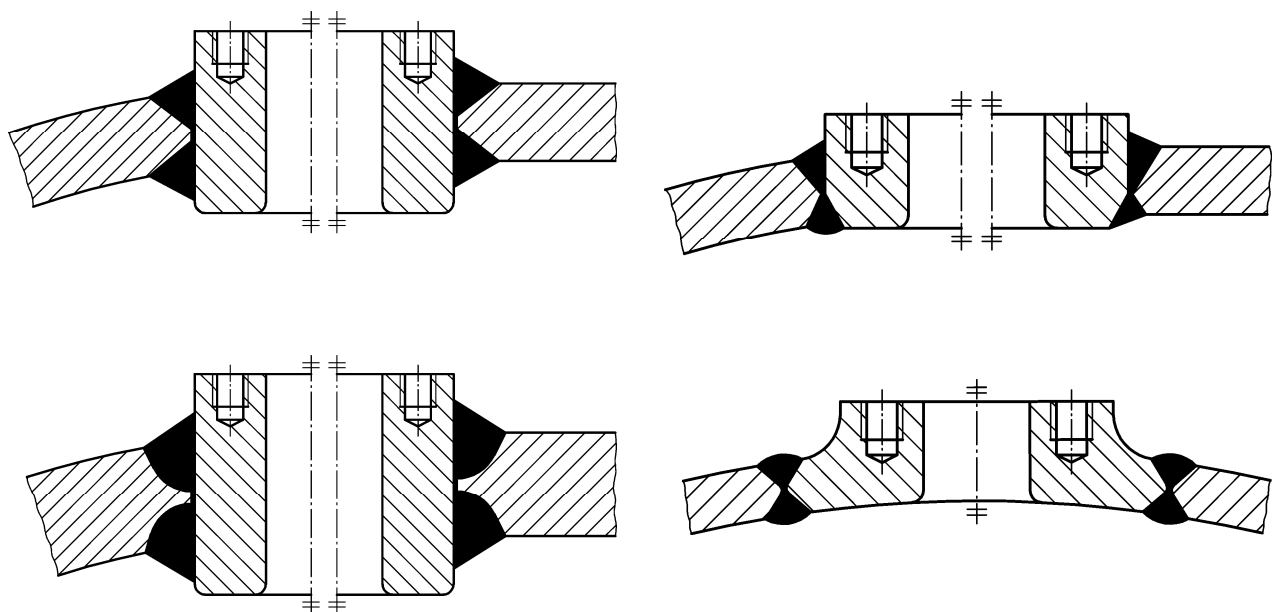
Typical examples of butt-welded studded connections
